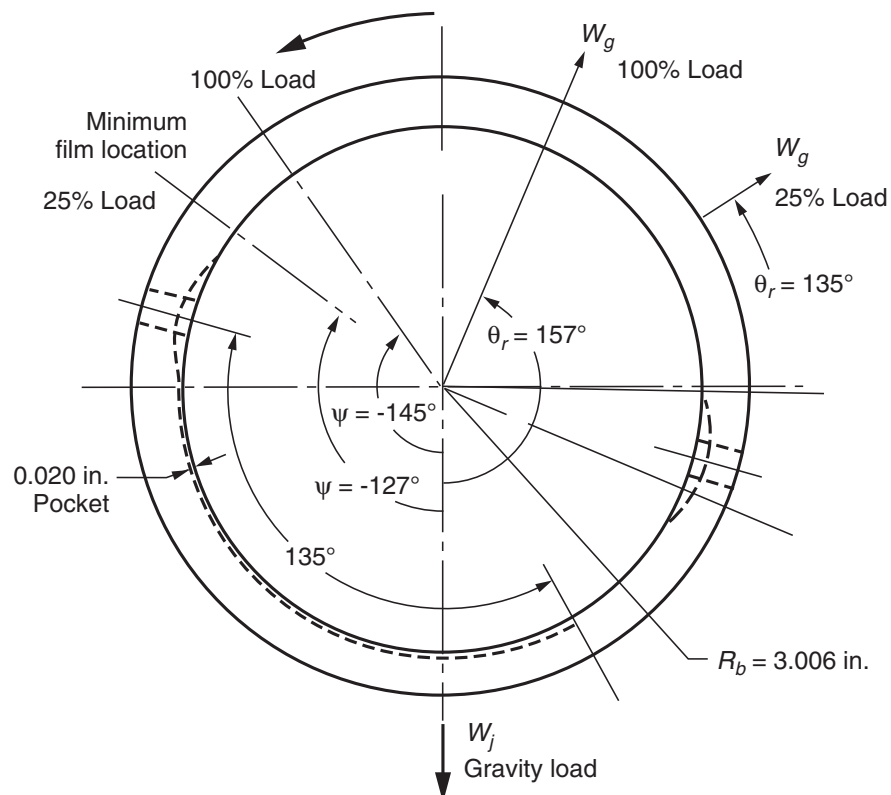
High-speed Gearbox Pressure Dam Bull Gear Bearing
